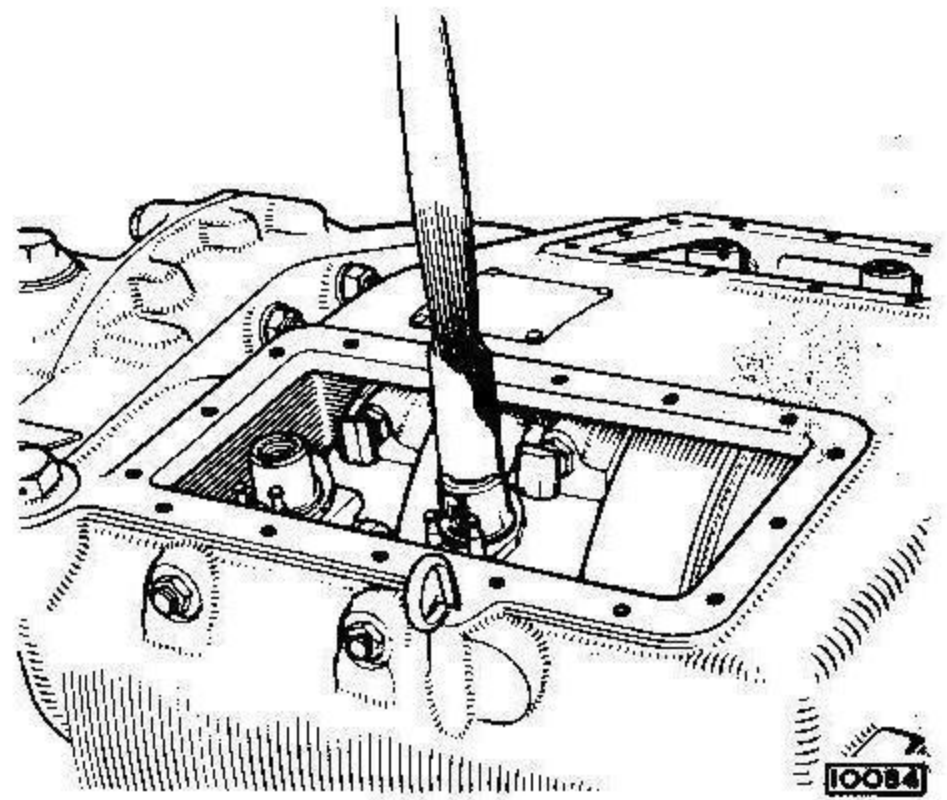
Turning the adjuster nut. Note the spring is removed before turning.
